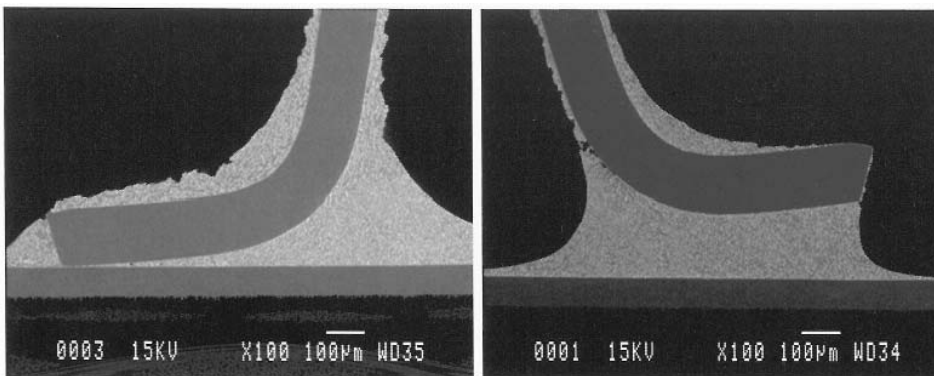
Microsections of corner solder joints on the board with EPO-TEK 930 as staking compound
